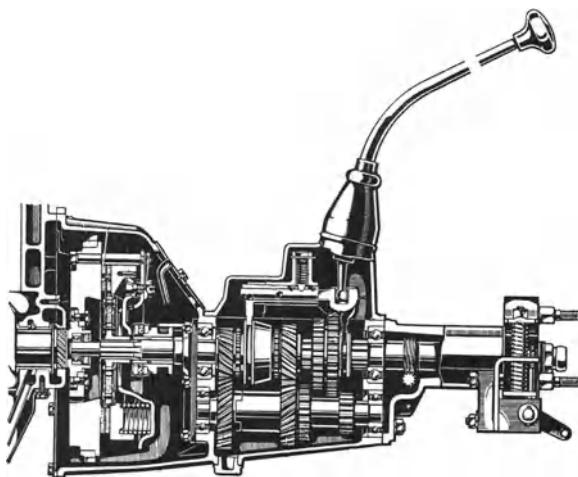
Four speed gearbox of the FIAT Balilla of 1934. The drawing shows a longitudinal cross section; the rear of the gearbox has a sliding train for the first, second and reverse speeds; the front features synchro-mesh gears for the third and fourth speeds (from Genta Morello 2009)
